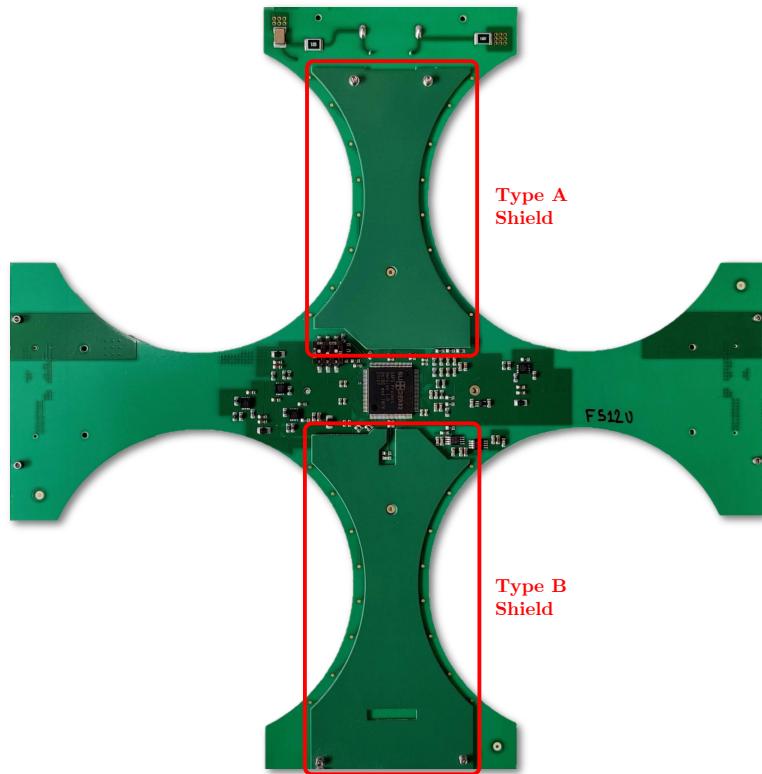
Type A and type B front-end board shields mounted on a front-end board.
